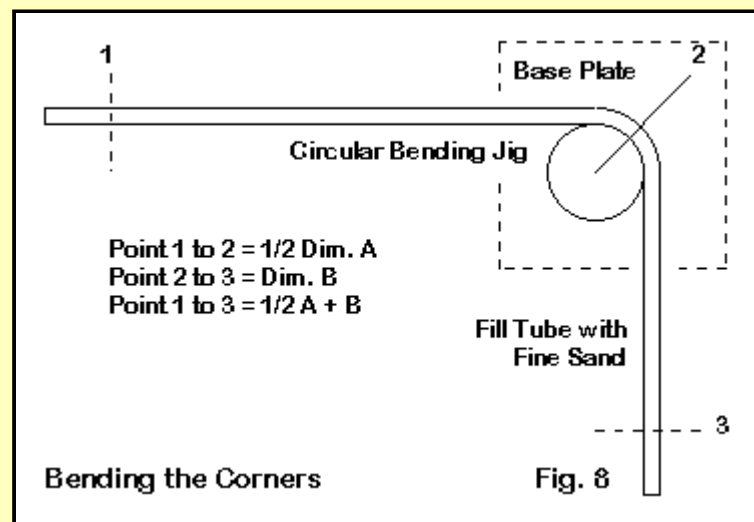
shows a simple jig: a circle mounted on a base plate. The circle can be cut from plywood or be a pulley wheel. For larger radius bends, I have used such materials as a worn-out power mower wheel.
